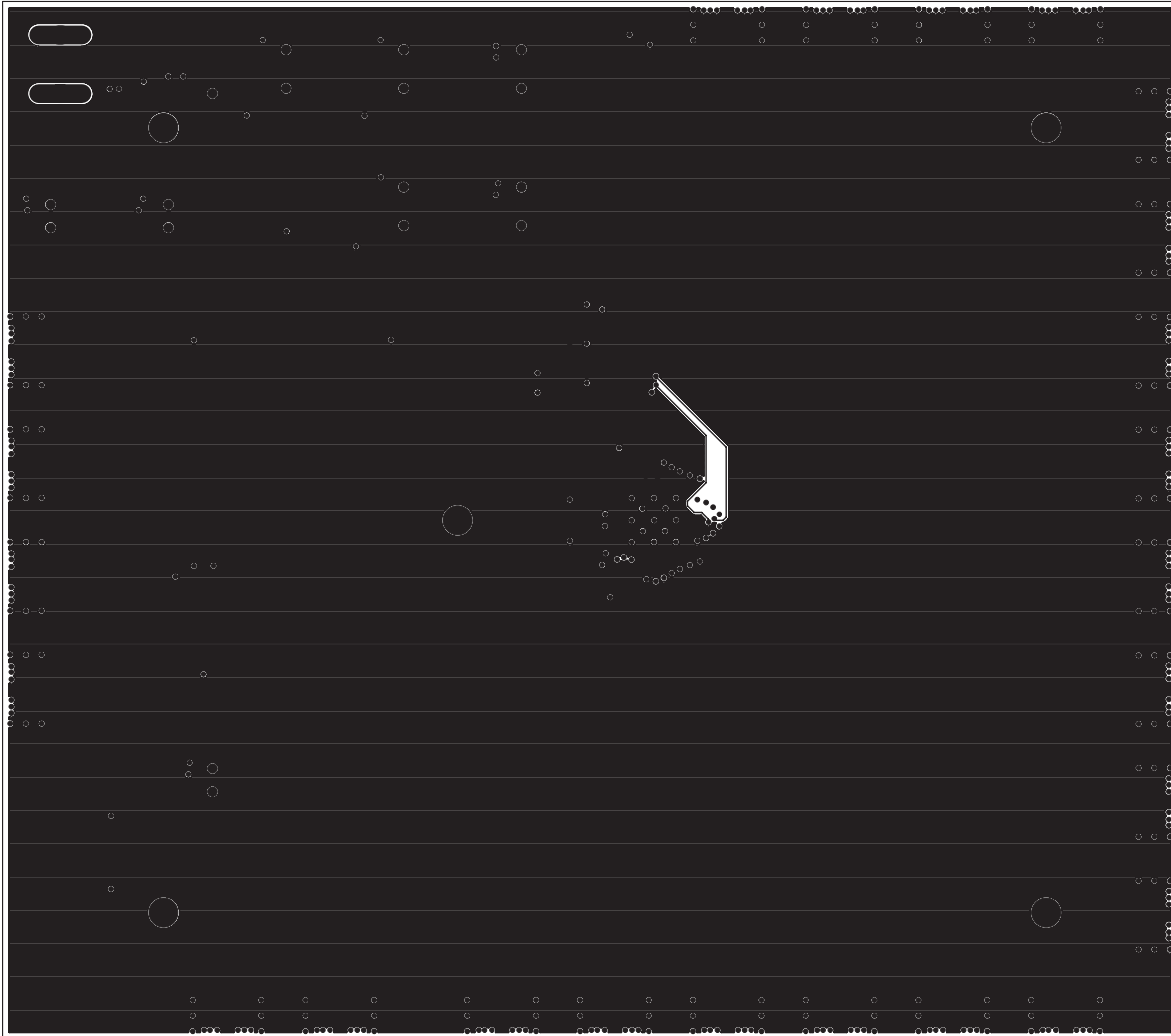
MAX3673 EV Kit PCB Layout—Power Plane
